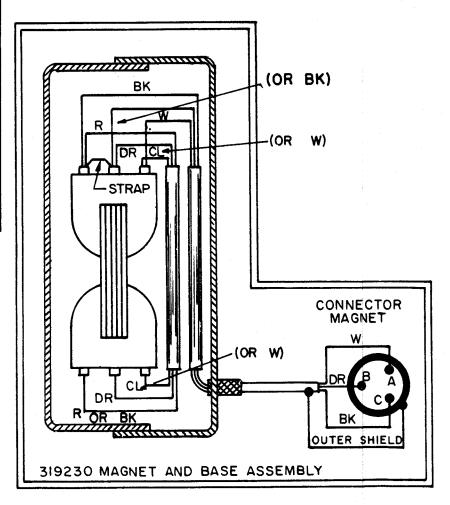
323813 Electrical Service Assembly Wiring Diagram (Sheet 3 of 3)
